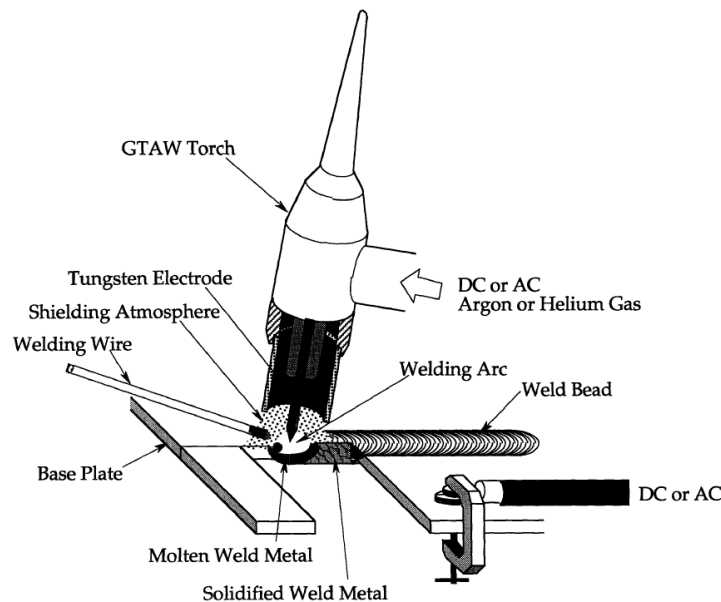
Gas Tungsten Arc Welding torch [17]
